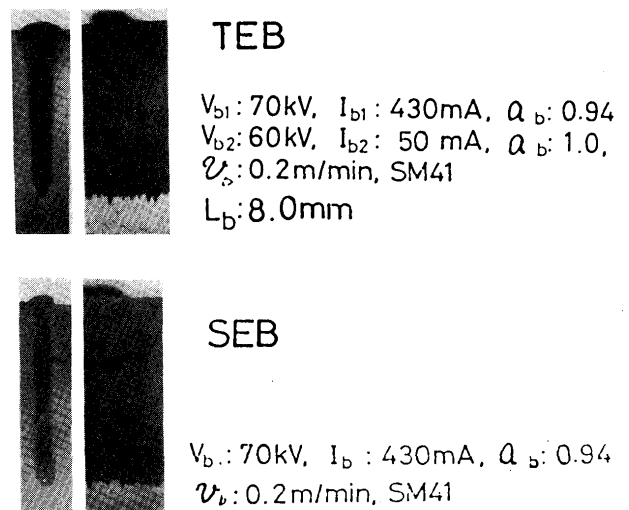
Comparison of bead sections between advancing angle TEB welding and SEB welding.
